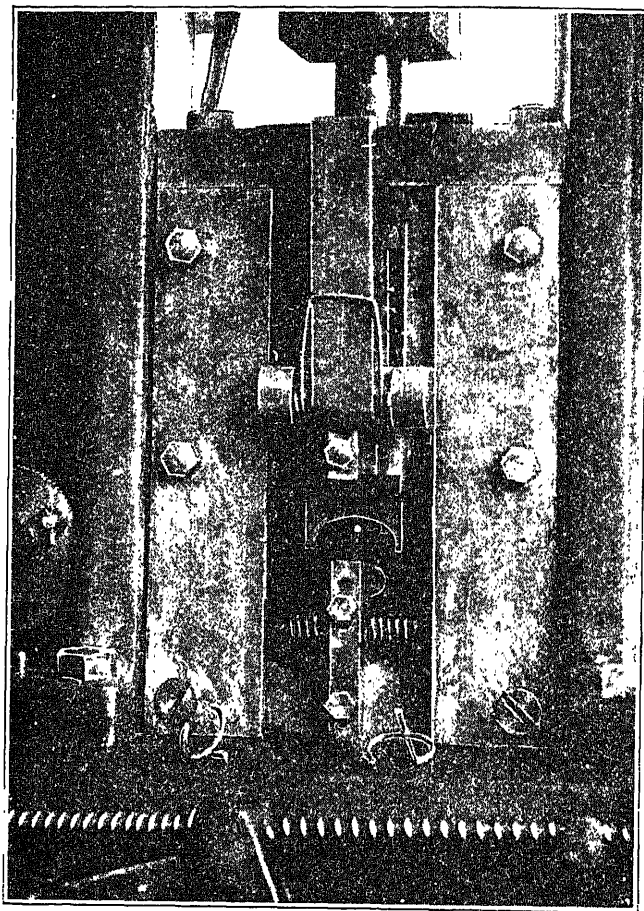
Close-Up of Front of Hog-Ring Machine.
